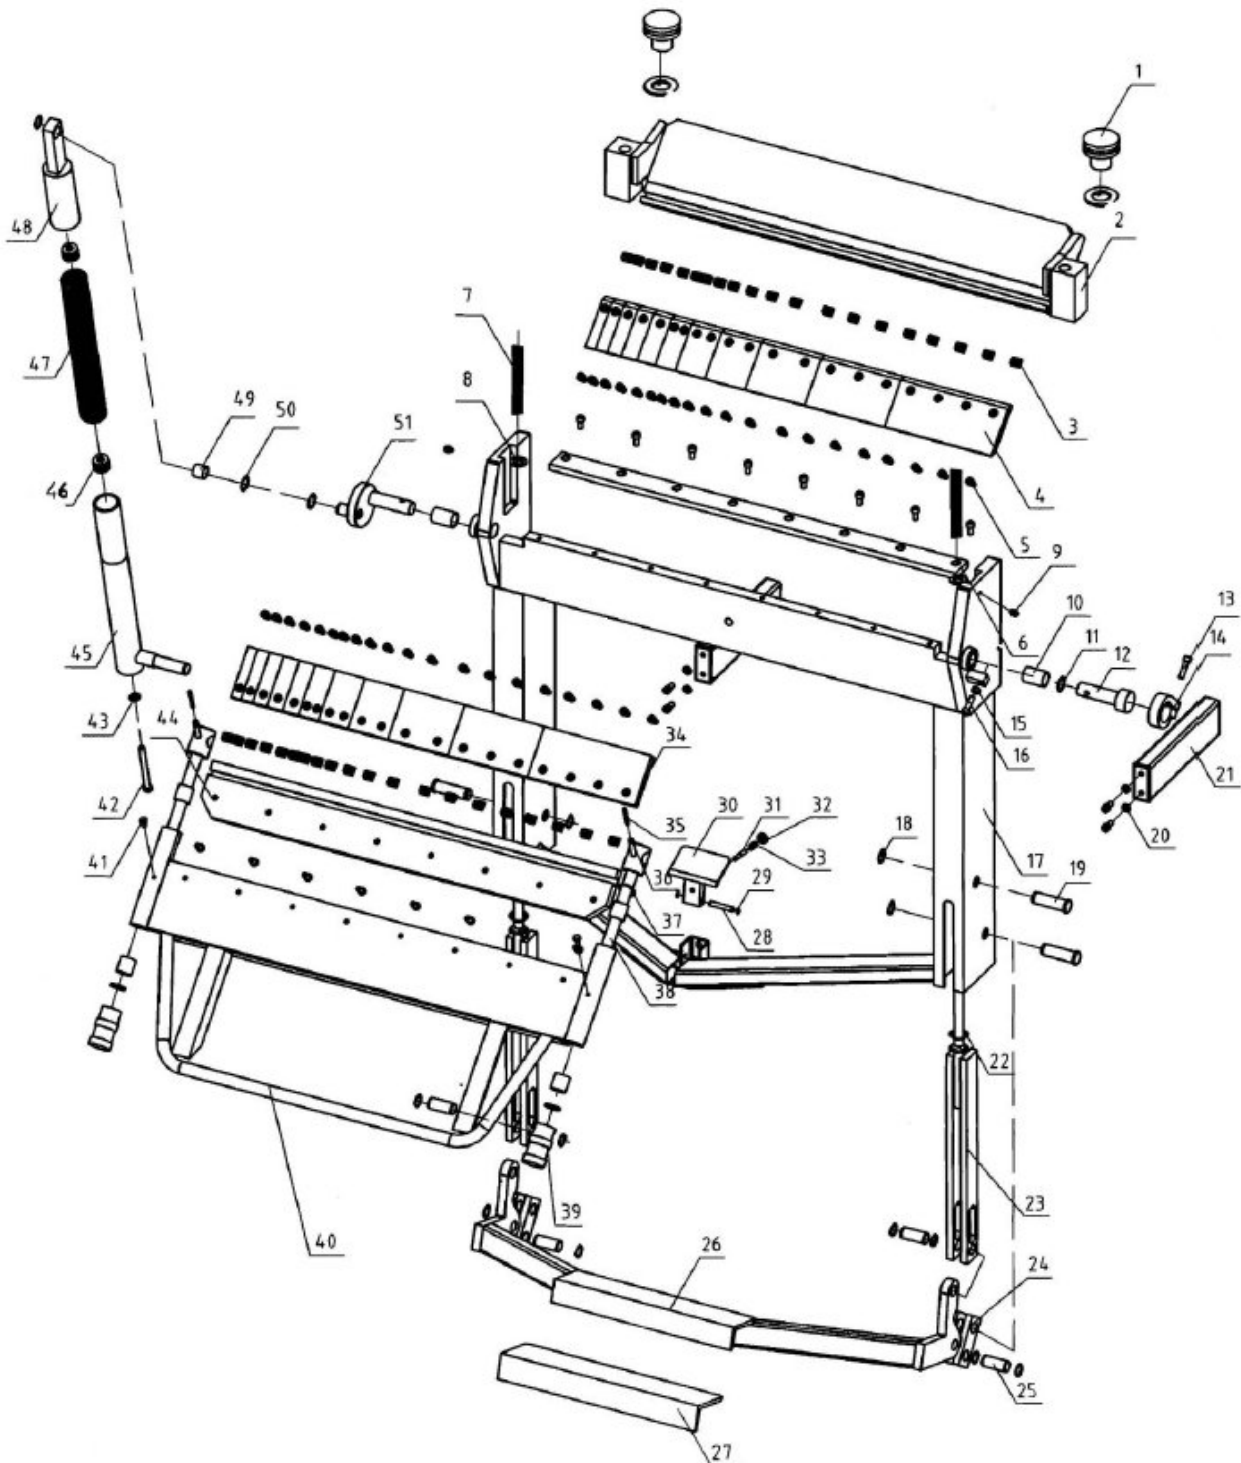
Spare parts FSBM 1020-20 S2 and 1270-20 HS2
